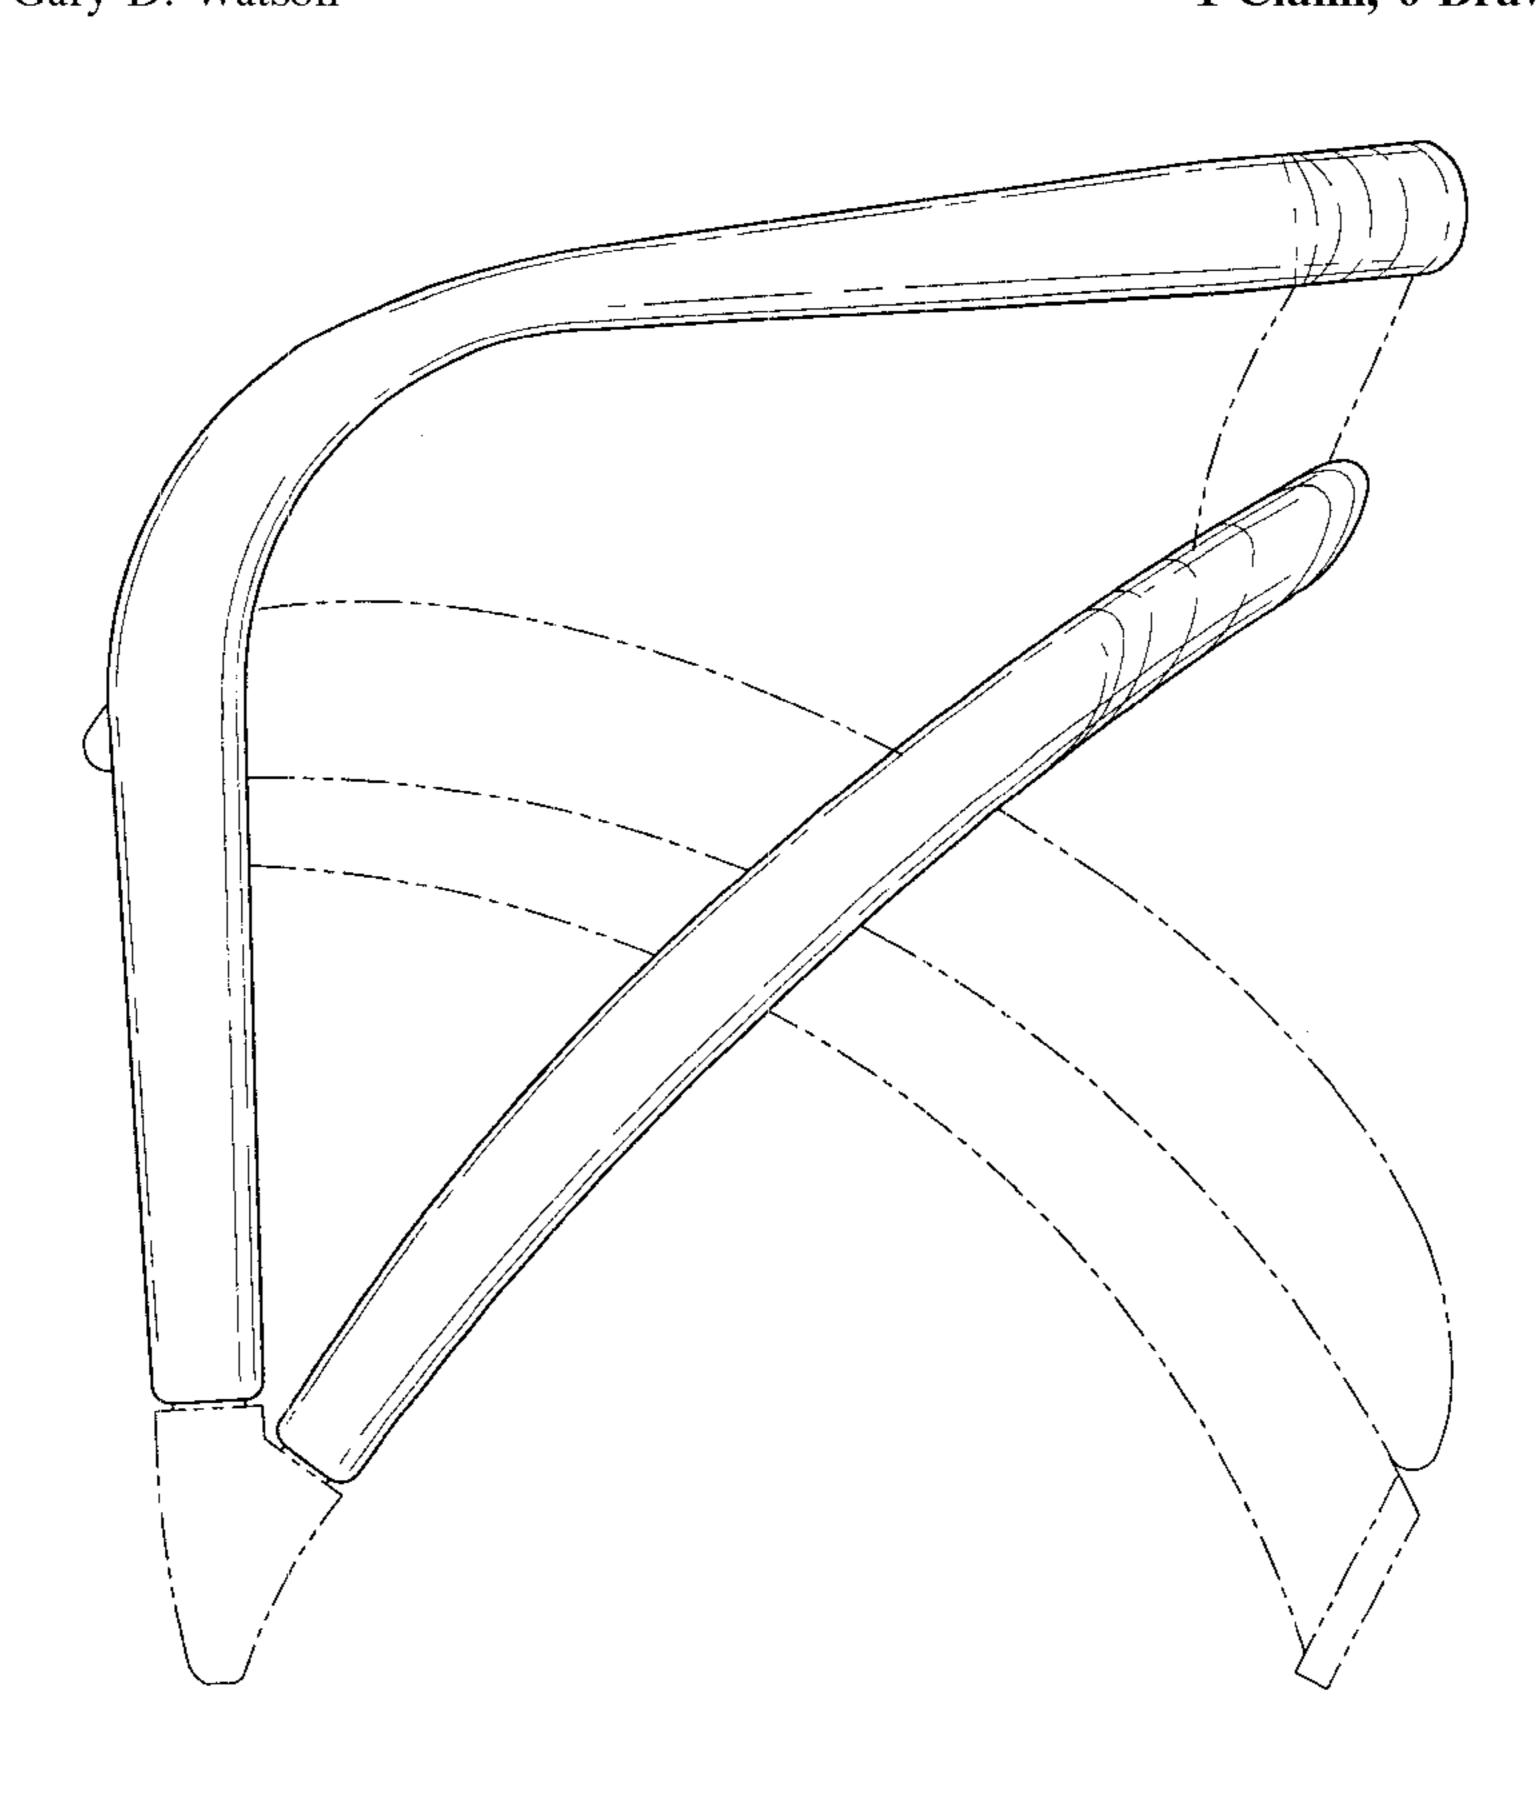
is a front elevational view showing the design of the support structure of FIG. 1;
